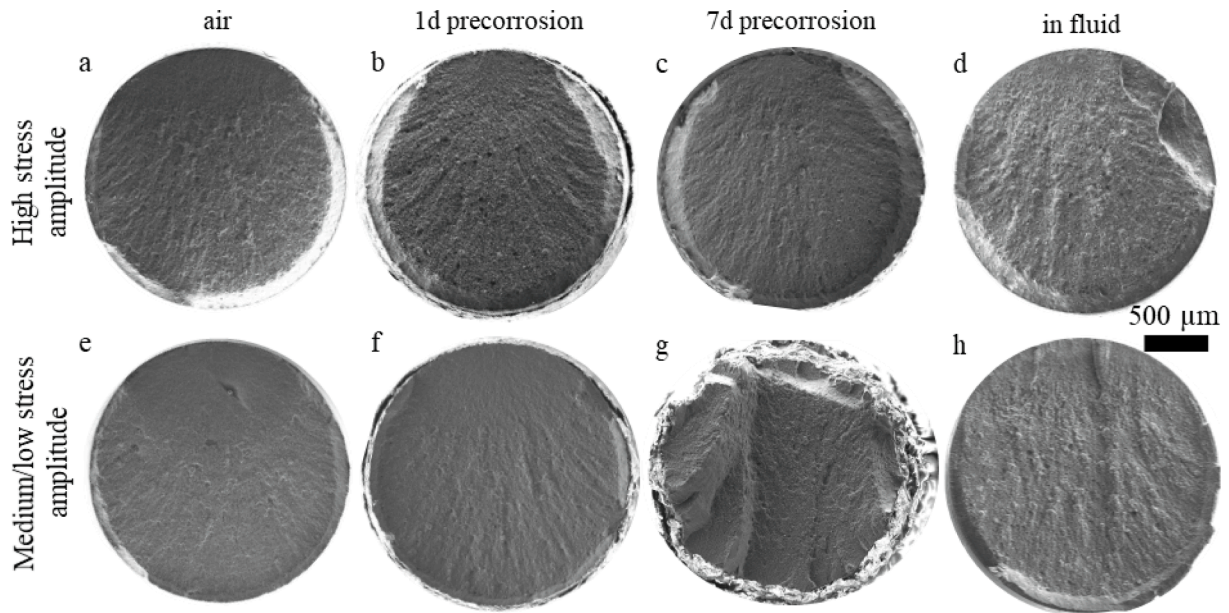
Fracture surfaces of WE43 specimens cyclically loaded in air, in air after pre-corrosion for 1 or 7 days in DMEM or in DMEM.
